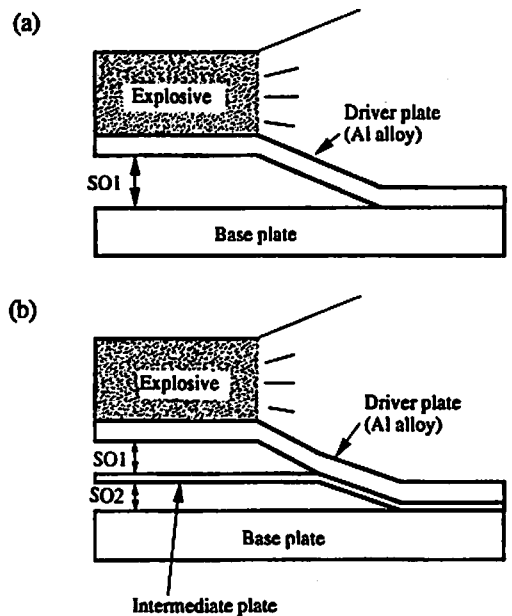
Set up for conventional explosive welding (a), and by use of intermediate plate (b)
